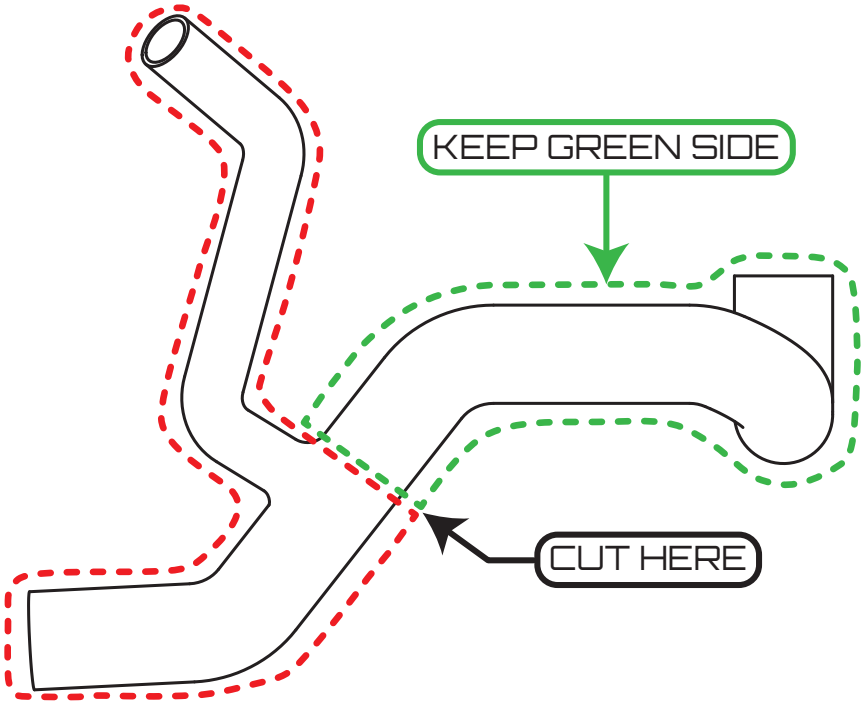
Cut Line for EFR-800 Radiator Hose: SVT Cobra & Mach 1 Trims
